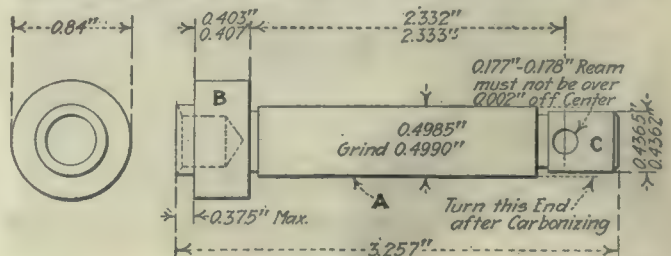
THE SHAFT TO BE COATED WITH PARAFFIN
